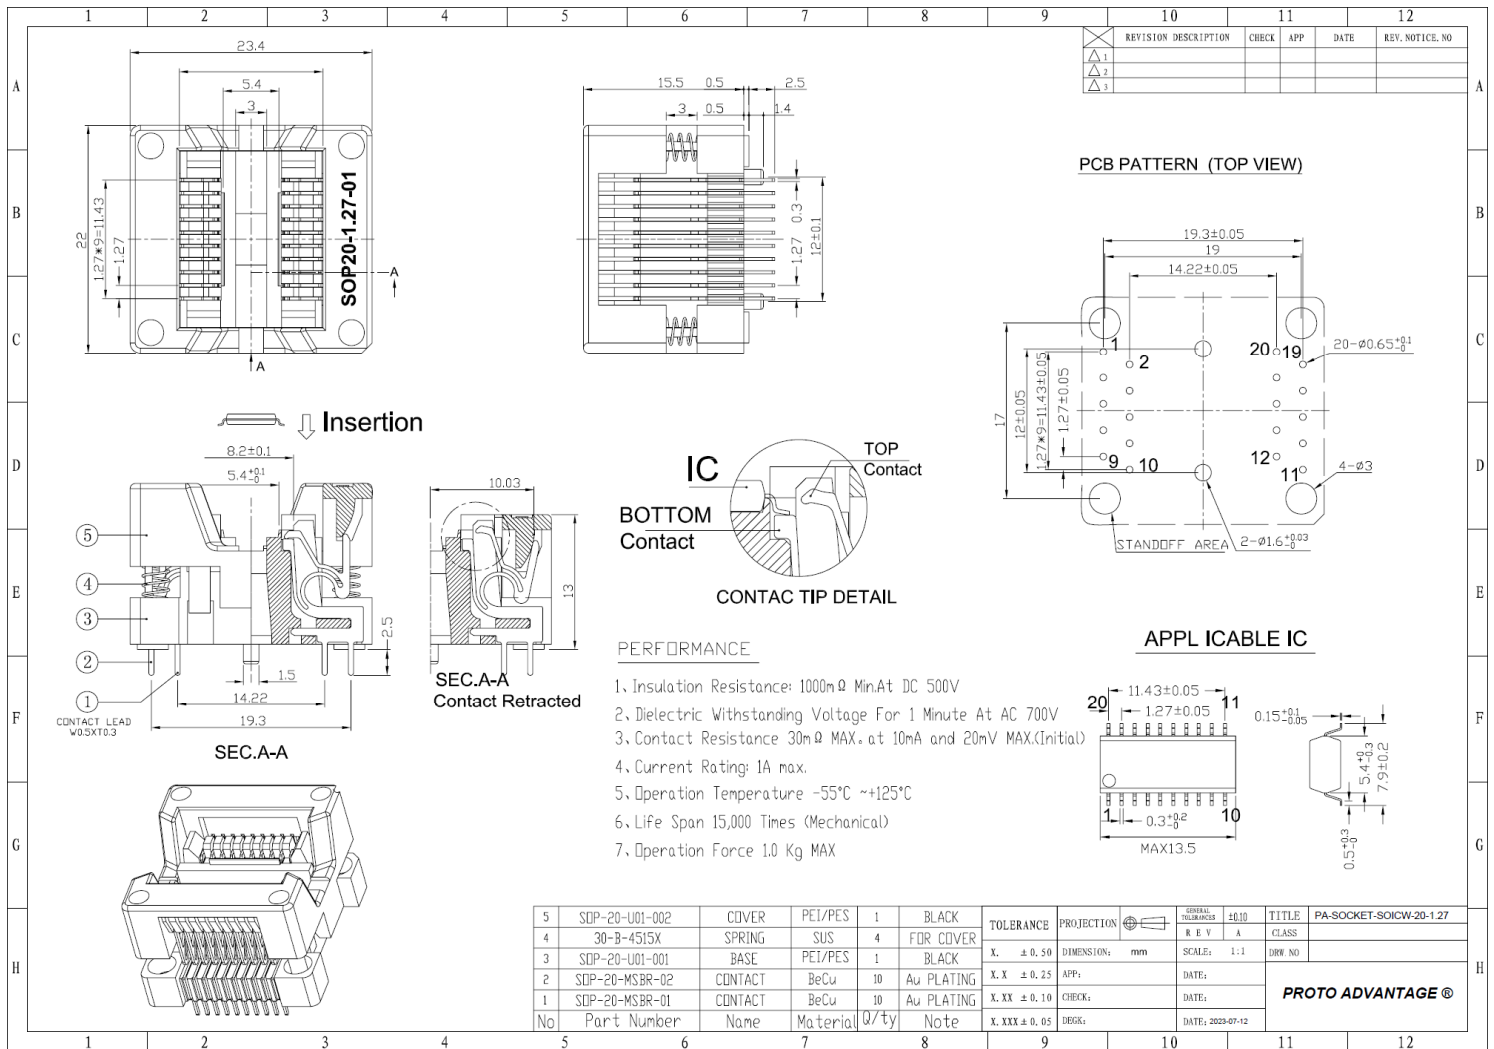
Proto-Advantage PA-SOCKET-SOICW-20-1.27 Socket Drawing
